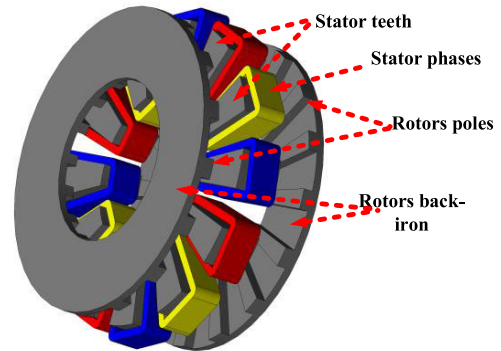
A 12/16 dual-rotor single-stator toothed-rotor AFSRM.
